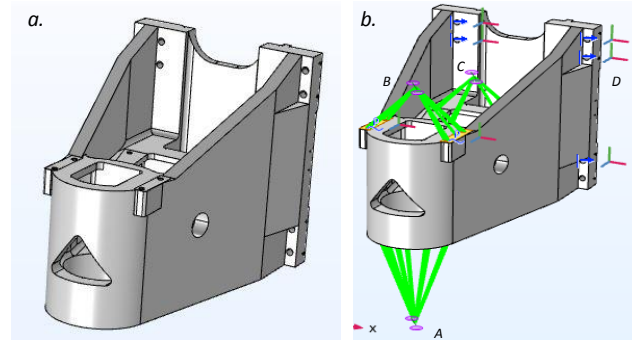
Version 3: A final modified spindle head *a.* 3D model and *b.* 3D model with the boundary conditions due to assembly
